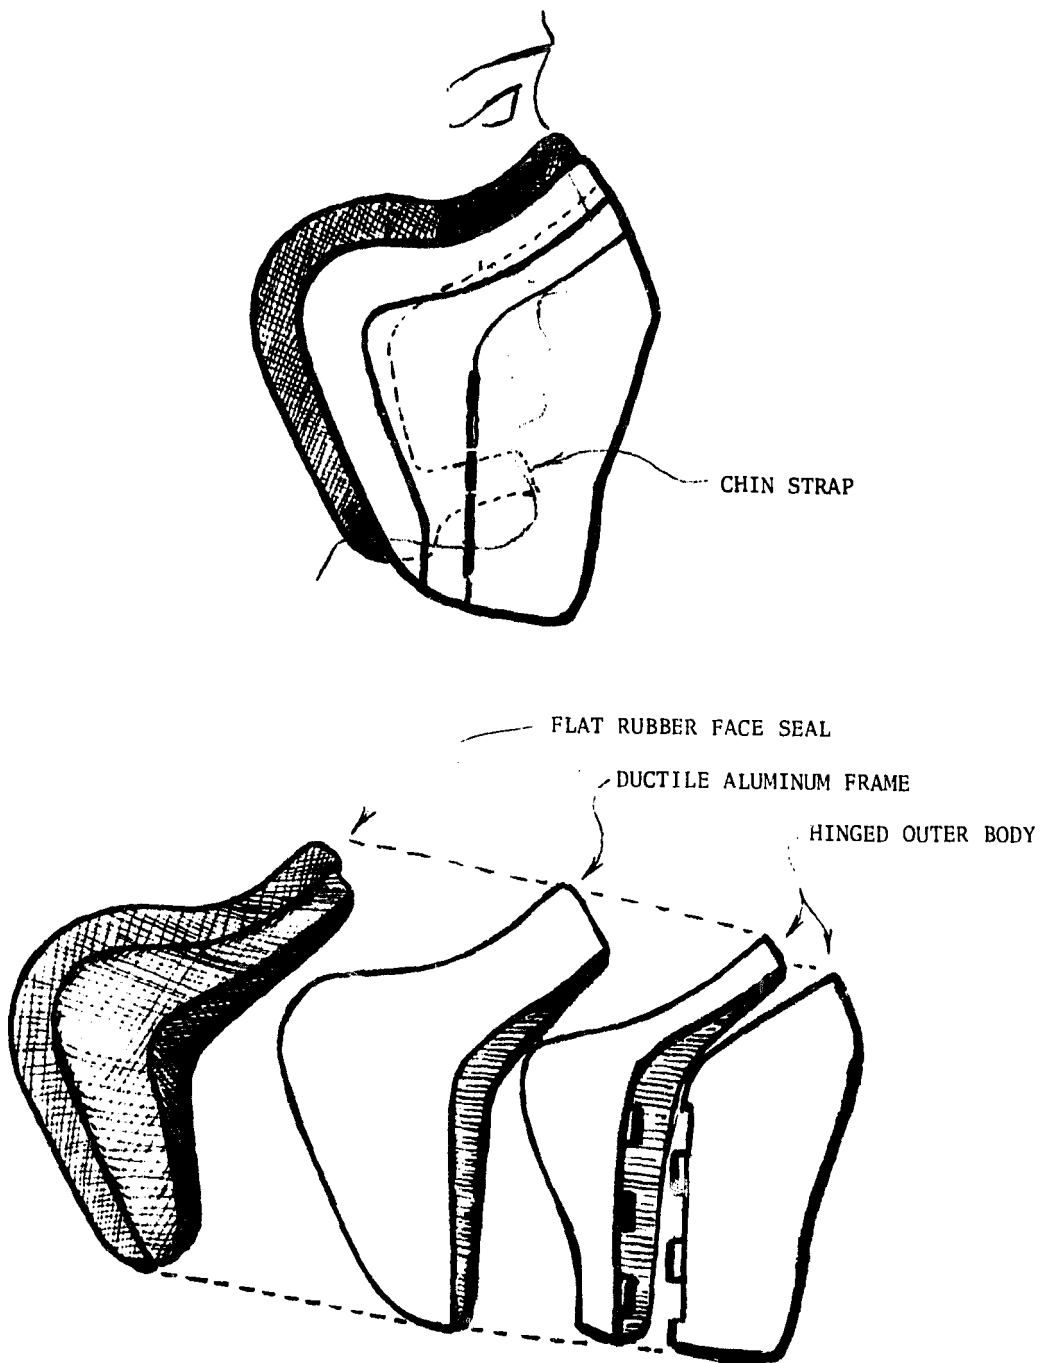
Facepiece Assembly (top) and Components From Which it is Assembled.
